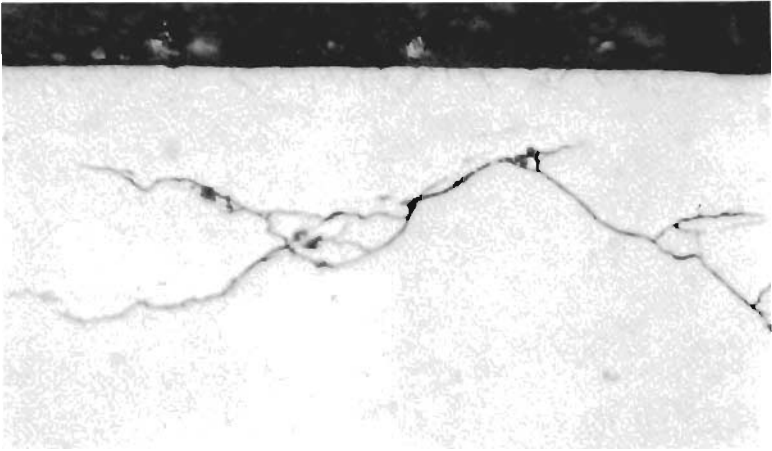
Gear tooth section, 200 \times . Unetched. Rolling contact fatigue distinguished by subsurface shear parallel to surface. Note the undisturbed black grain oxides at the surface, indicating no surface material movement.
